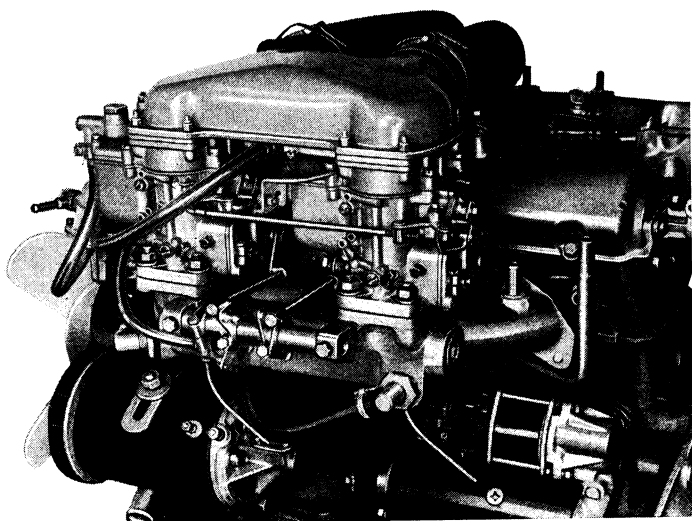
Weber carburetors in place on engine 118 B.000.
